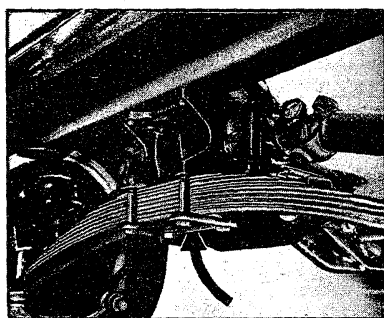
Rear Axle Unit Number Located Bottom Surface of Carrier at Cover Mounting Flange—Corvette
